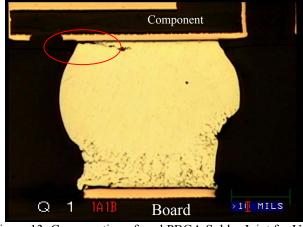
Cross-section of a wbPBGA Solder Joint for Unit 1, Board 8, for Leg 24.
